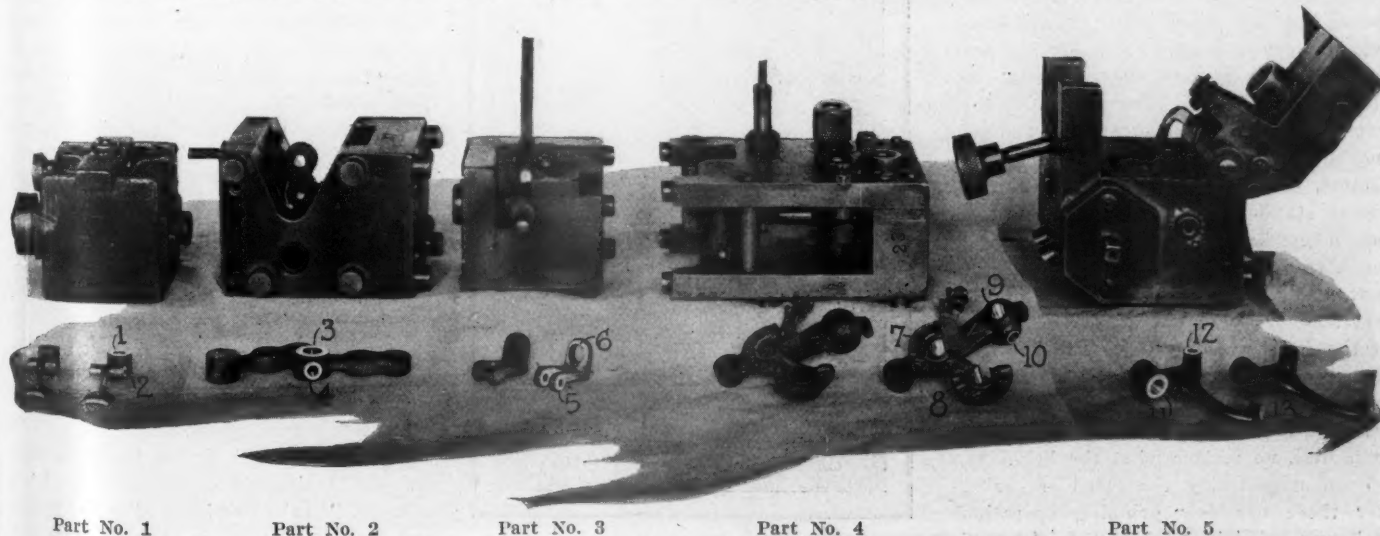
FIVE TYPICAL JIGS USED IN WHEELER & SCHEBLER CARBURETER FACTORY
